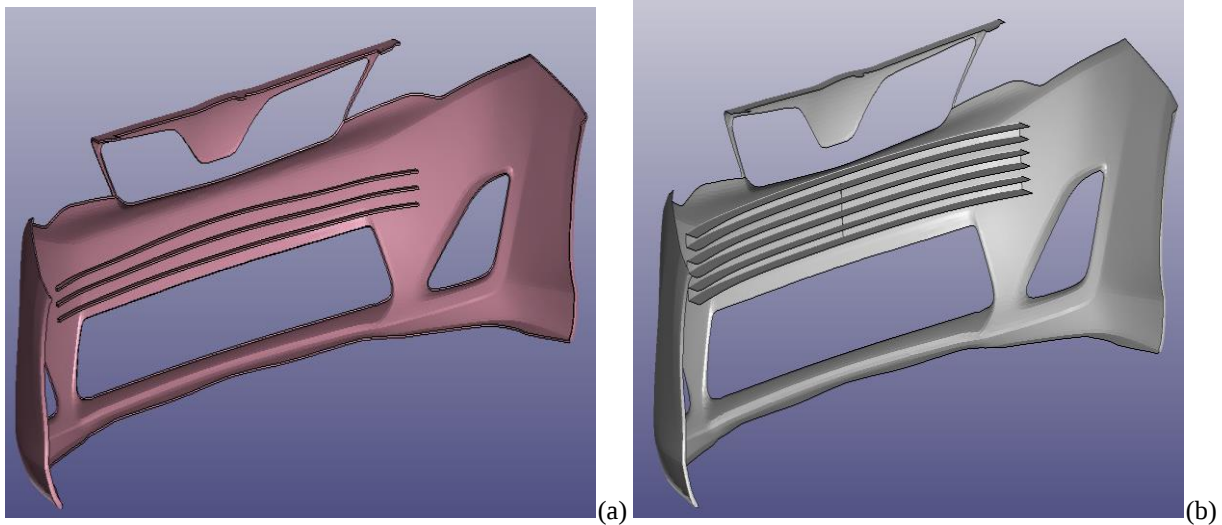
(a) rectangular section and (b) C-section reinforced bumper
